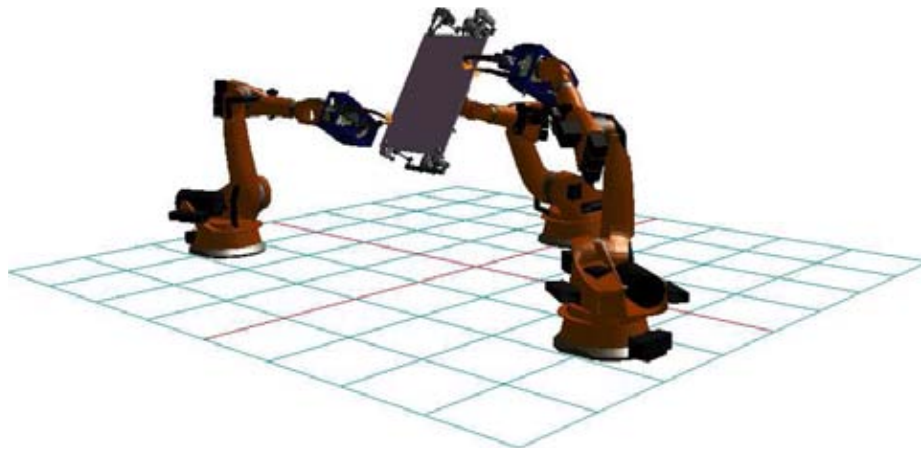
Weld point assignment and path-planning for cooperative robots
